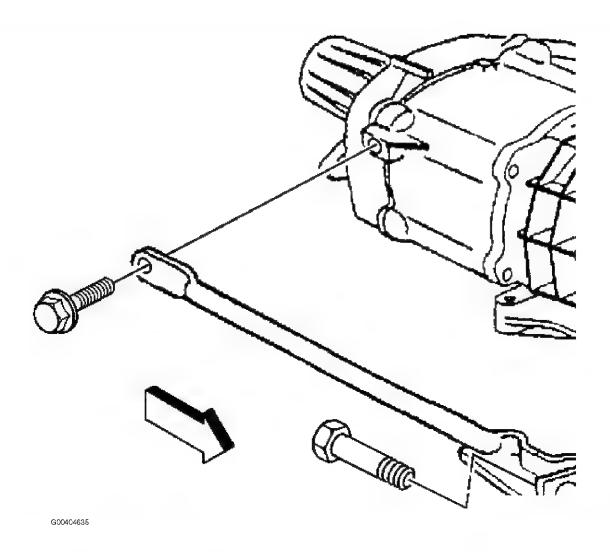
Removing/Installing Right Side Transmission-To-Transfer Case Support Brace Bolt (4WD)
